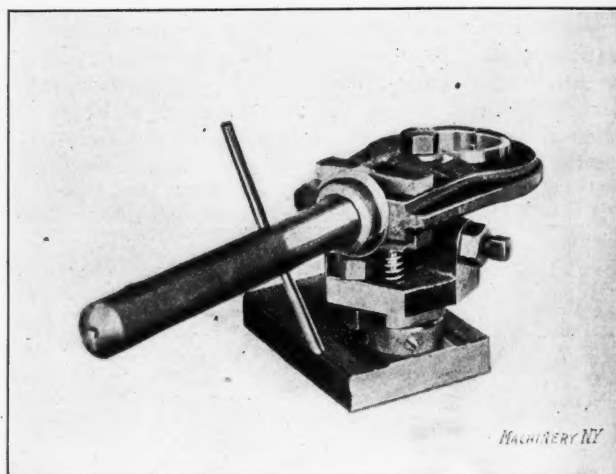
A Special Fixture for Cutting Oil Grooves in the Equalizing Gear Bushing
